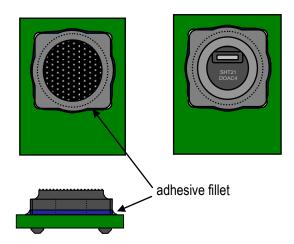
Assembled filter cap with adhesive fillet (left views) and removed filter membrane for process setup (right view).
